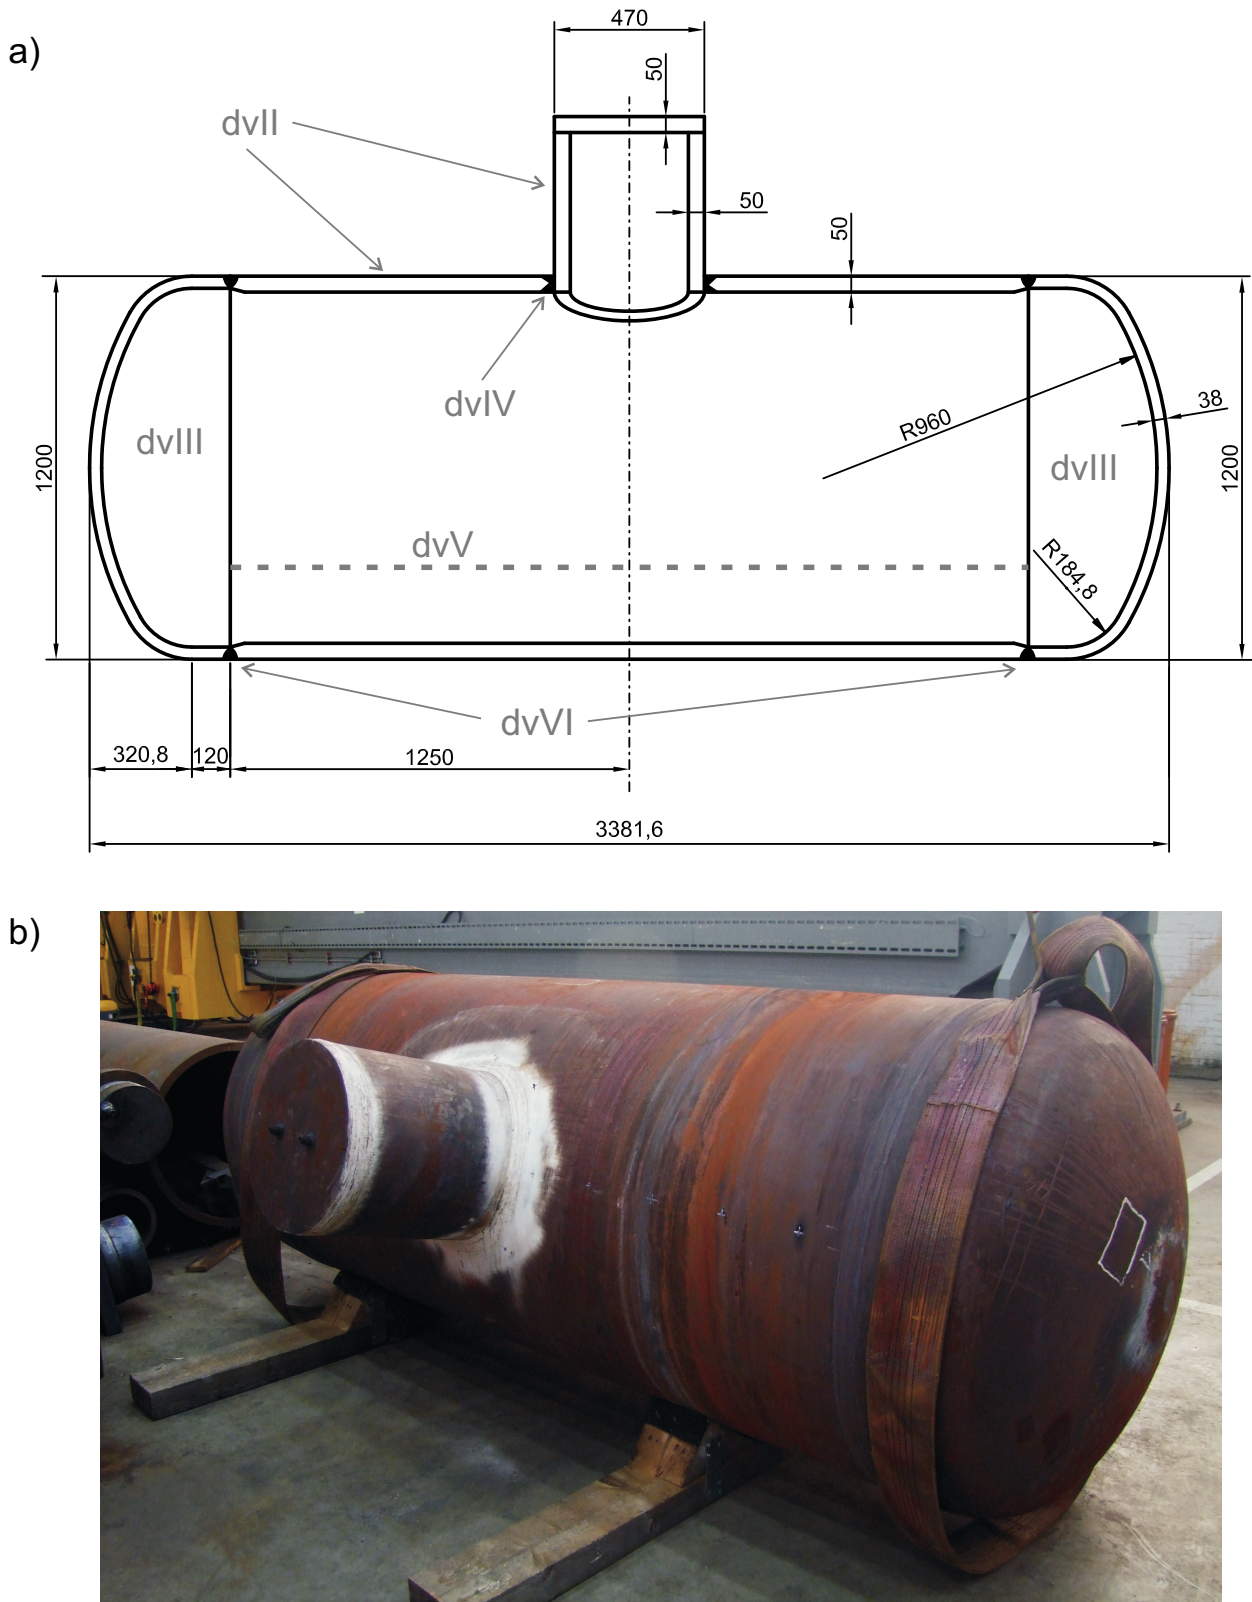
a) Dimensions of the demonstrator pressure vessel in mm. The material acronyms are marked in grey. b) The completed vessel after manufacturing and heat treatment.
